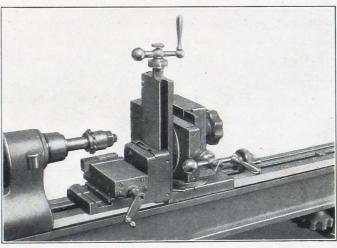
Milling Attachment with Angle Iron and Vise set as plain miller for milling teeth in rack.
